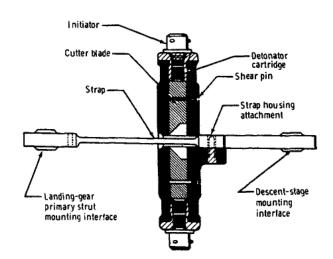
Lunar module landing-gear uplock and cutter assembly.
